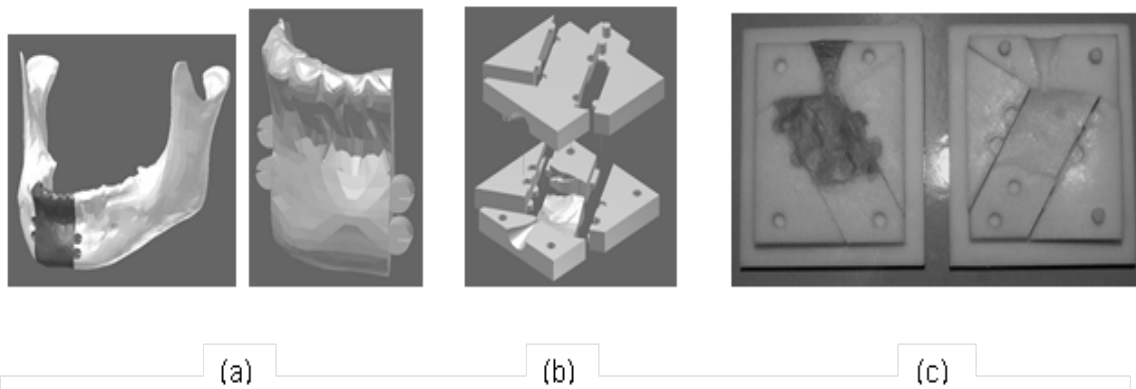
(a) CAD implants model, (b) CAD multiple parts mould of implants and (c) FDM fabricated mould with one-half of the mould filled with modelling wax as used in LWC.
